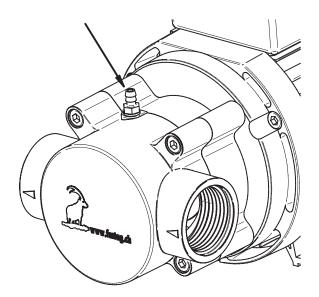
Threaded nozzle for Siphon Protection screwed in place
